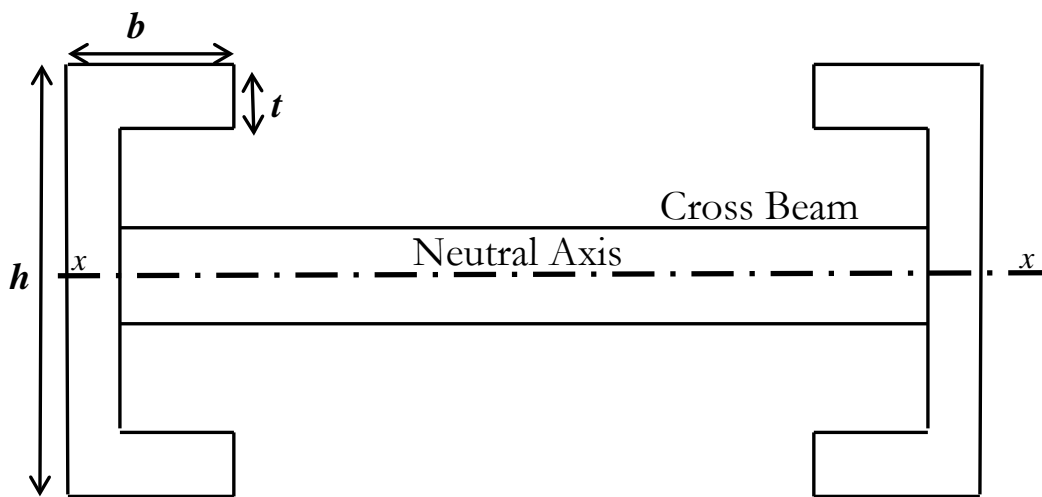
Typical Cross-section of Tractor Frame with Cross member
